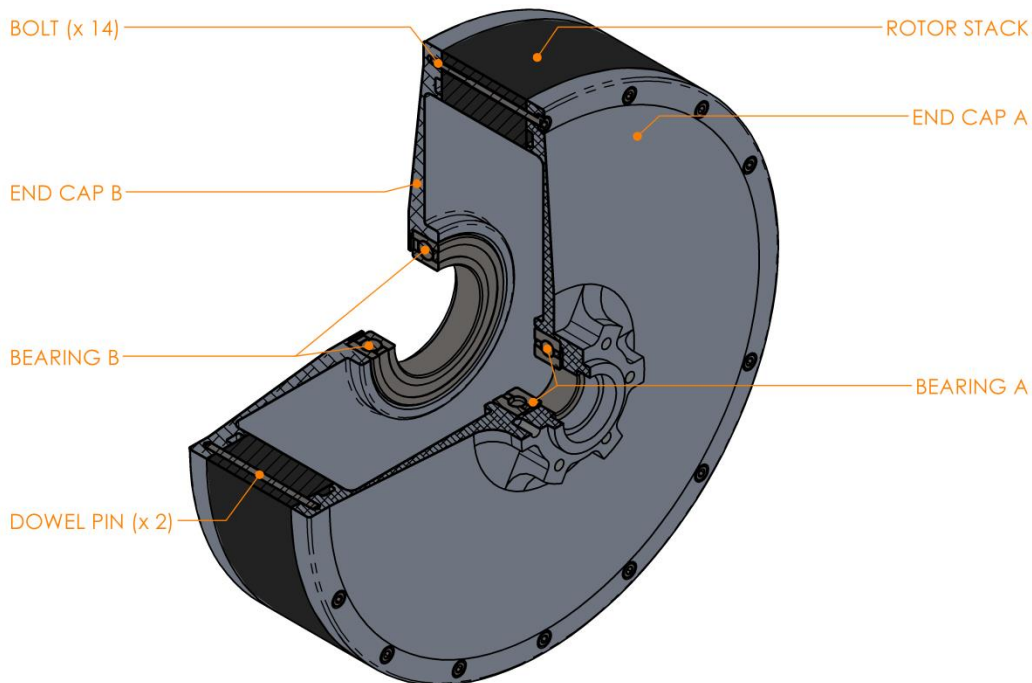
Rotor assembly detail (12/16 CSR prototype)
